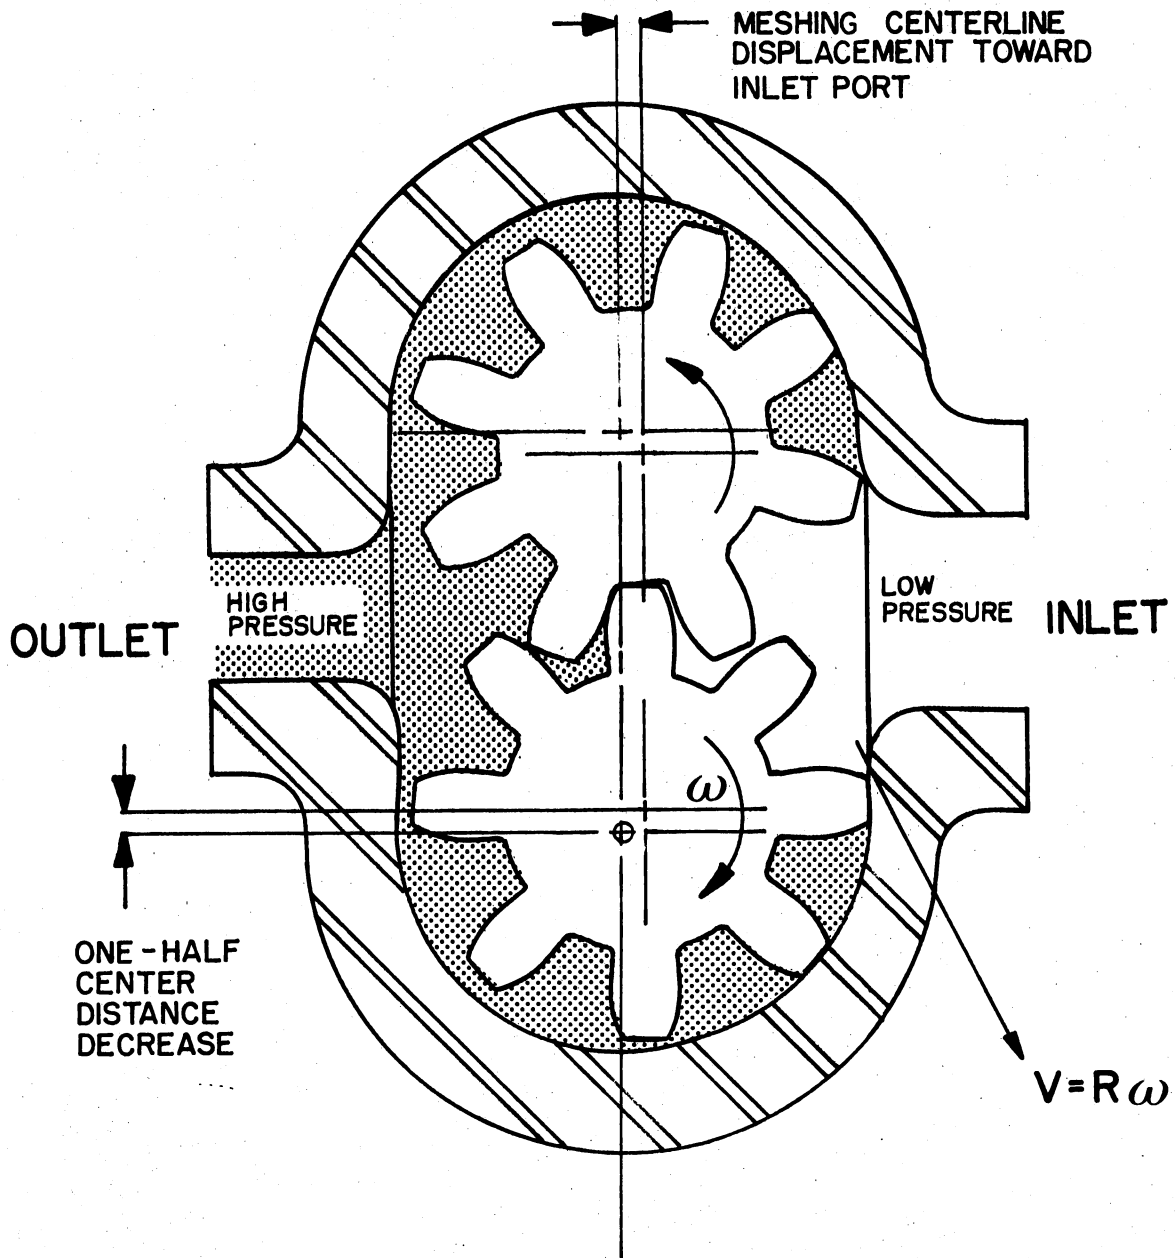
Gear Pump Section Illustrating Basic Operation, Exaggerated Meshing Offset Due to High Pressure, and Gear Tooth Tip Velocity
